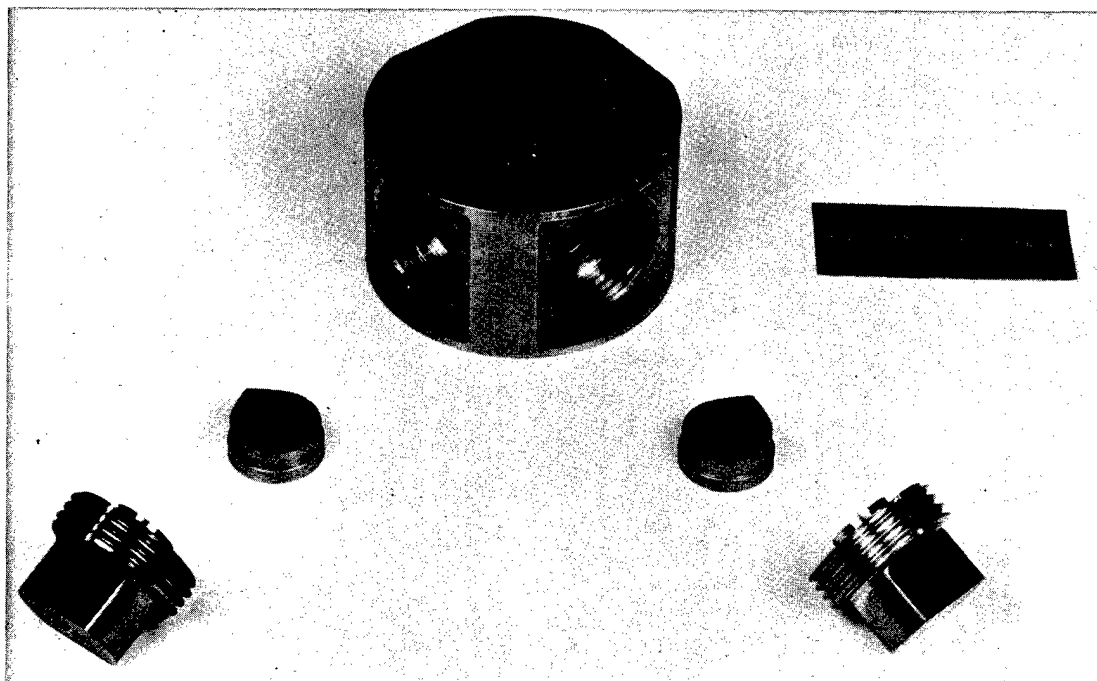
Welding junction and liquid-metal flow direction control, component machined from W — 25Re — 30Mo alloy. Welding of connecting tubes entering from the opposite side as shown in the photograph is accomplished through the holes shown in the foreground. The plugs shown close the welding parts. (Neg. P68-2-5C)
